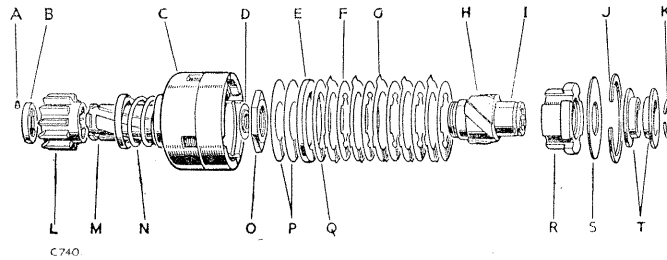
Exploded view of starter drive assembly, Diesel models
